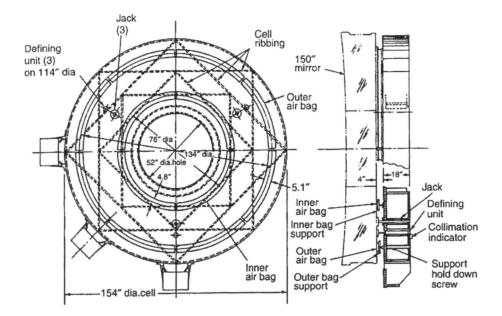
Layout of a double annular air bag support for a 150-in. (3.8-m) diameter mirror. Dimensions are inches. (Adapted from Baustian.²⁰)
